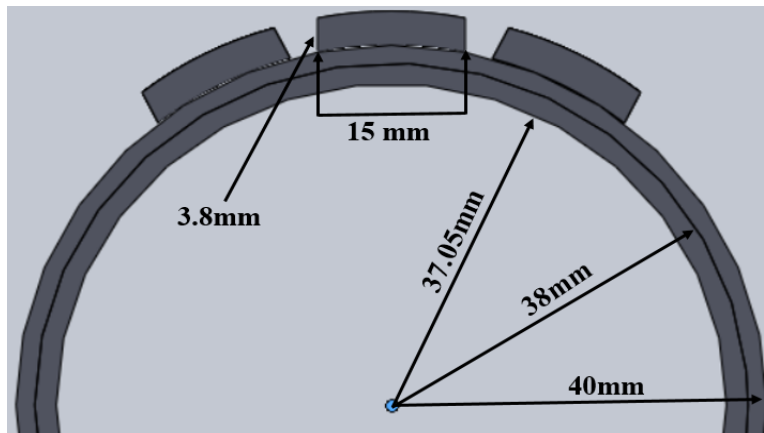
Cross-sectional view showing the dimensions for the cylinder.
